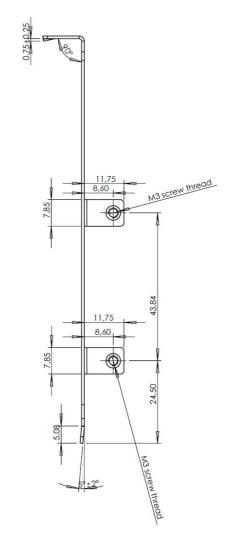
Dimensions Front Panel für CIFX 50-CO or CIFX 50E-CO
